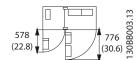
Space in front of IP21/IP54 enclosure type, frame size F9
